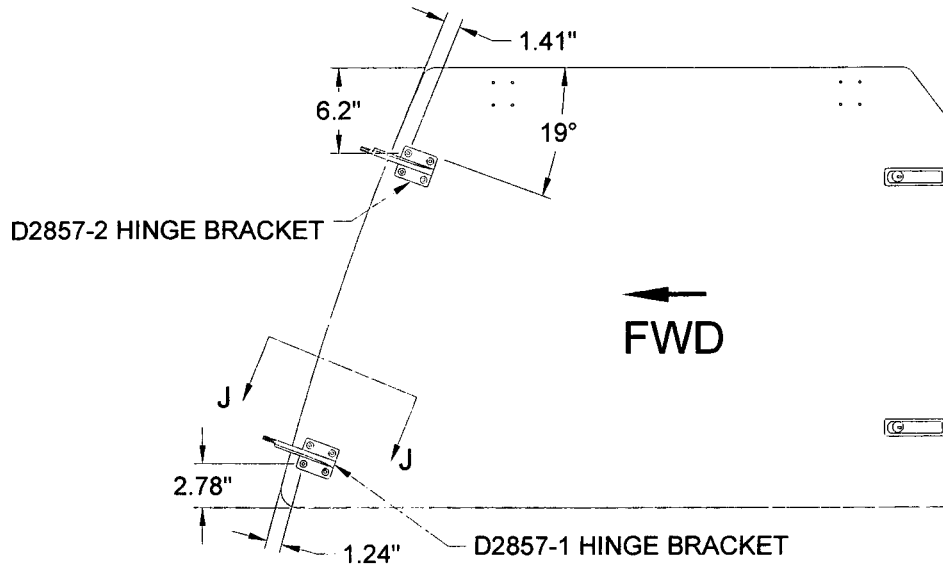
(a). HINGE BRACKET POSITION ON LH D3186-1 SPACEPOD DOOR
